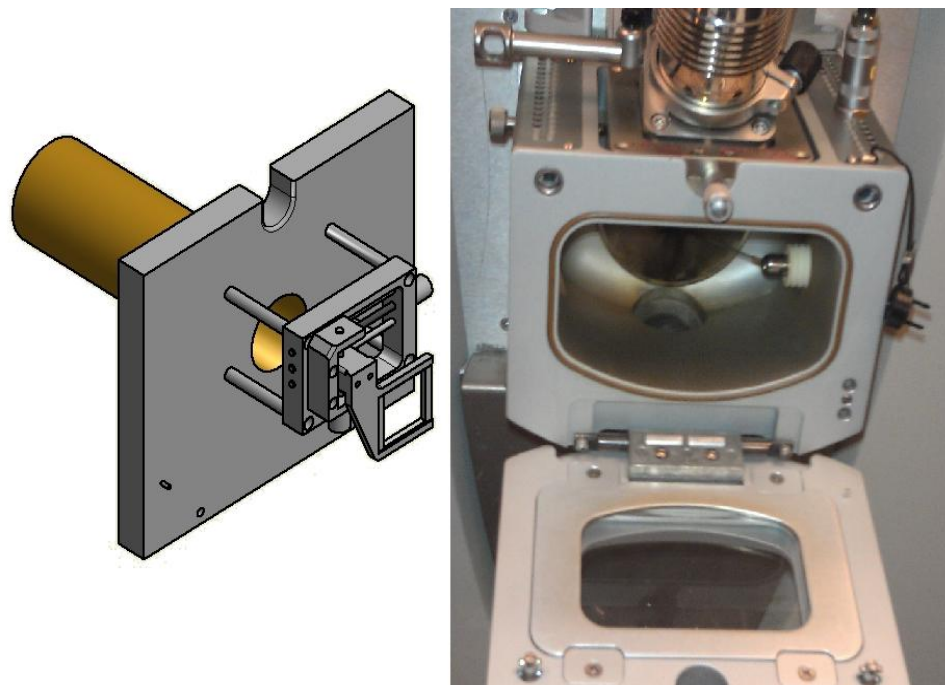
CAD drawing of the rastering assembly (left) and a photo of the Thermo Scientific LQIT ionization chamber with the front access door open (right). The rastering assembly replaces the front door while using the original hardware for attachment (reproduced from Reference 23).
